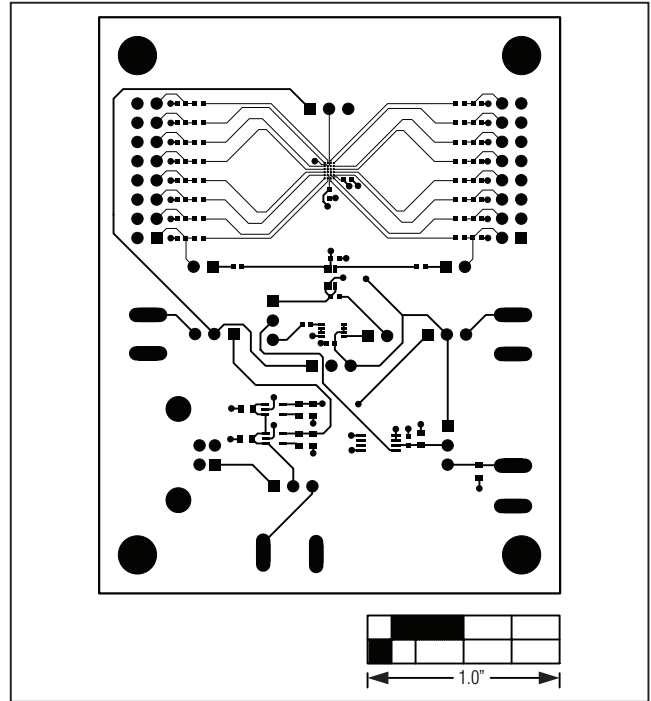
MAX13055E EV Kit PCB Layout—Component Side
